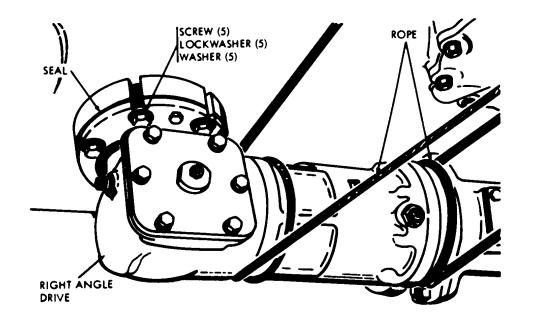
Removal or installation of hydraulic pump and drive assembly (sheet 1 of 3).
